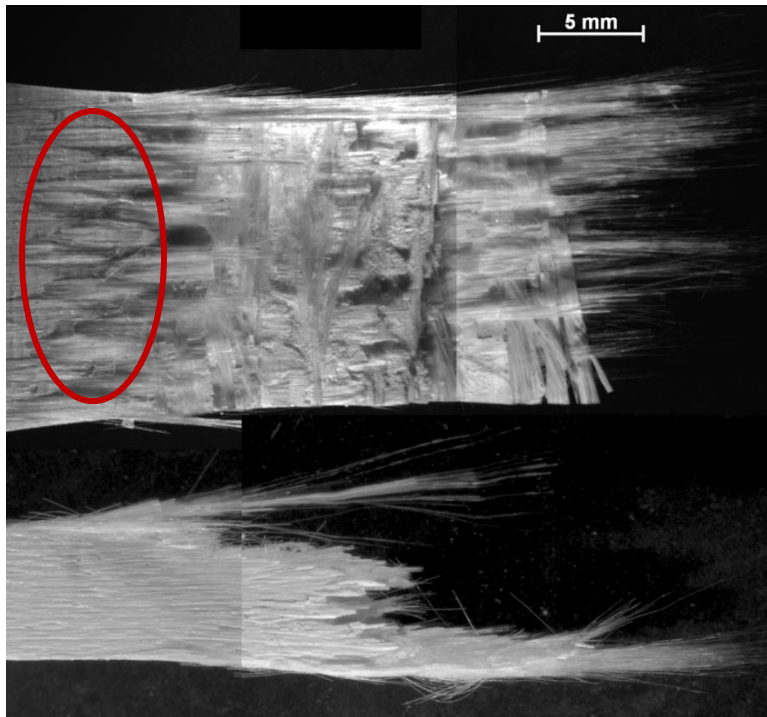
Fracture surface obtained in a compression to failure test at 1200°C in air.
